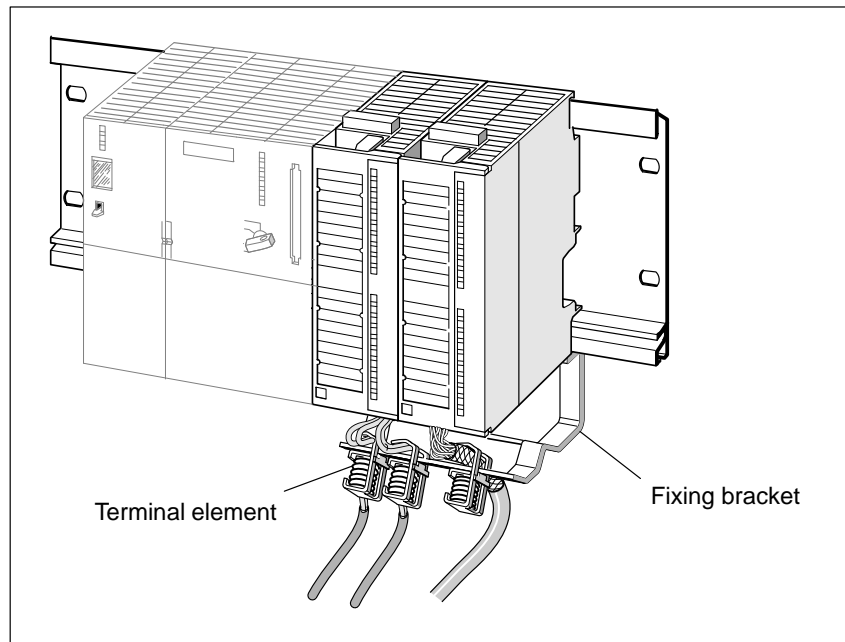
Signal Module Assembly with Shield Connecting Element
